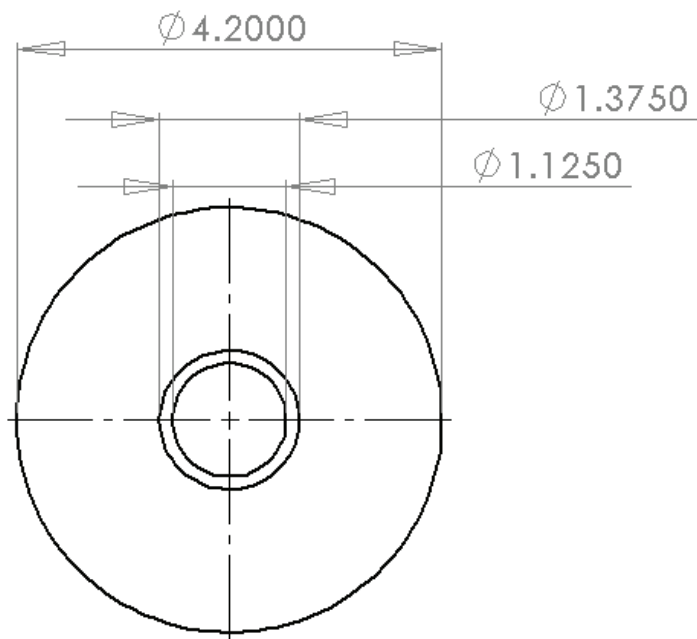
Mechanical drawing of the outside face of the part *left dummy hub.sld
